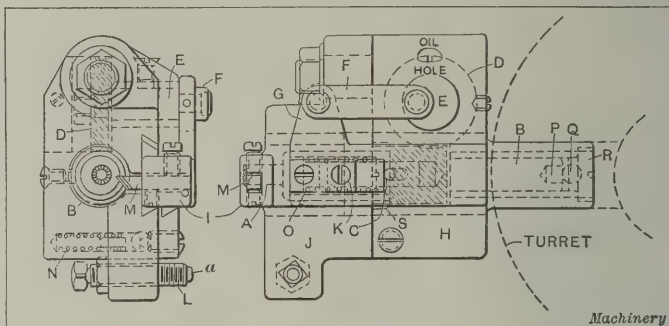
End and Side Elevations of Oil Groove Cutting Tool
